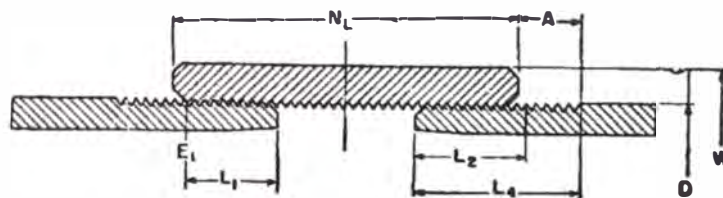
Dimensions of Hand Tight Assembly for Use with Table X3.2
